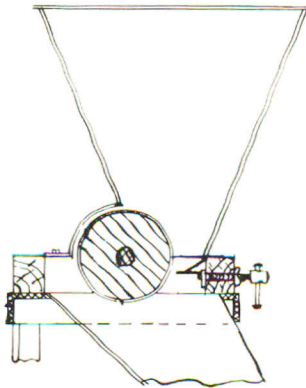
C. Prototype cylindrical grater: modification of the hopper, made of galvanized iron.
